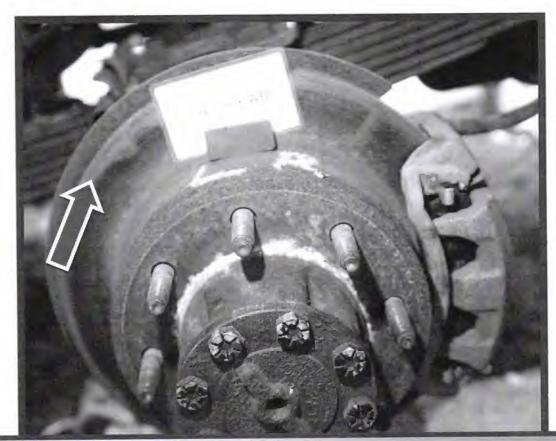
This photograph depicts the left rear disc brake components of the involved 2001 Ford Excursion stretch limousine prior to removal from the vehicle. Note the outer disc brake rotor swept area corrosion, which was a pre-existing condition (Red Arrow).
